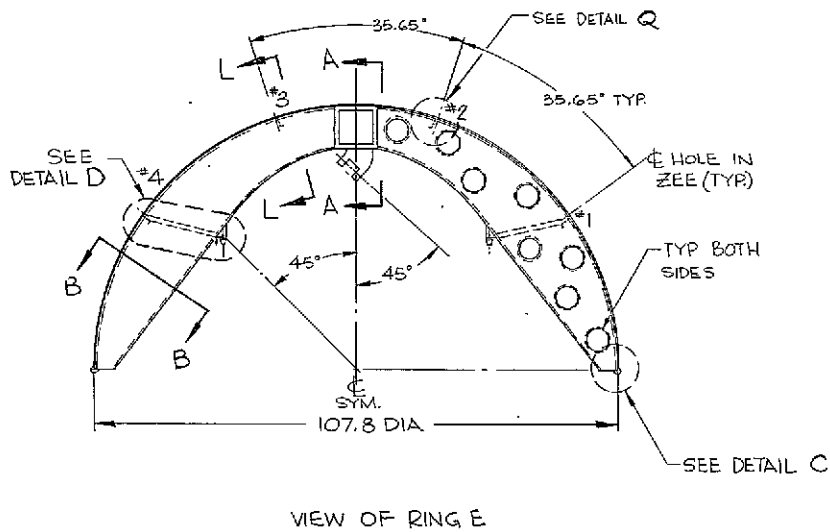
Hub Assembly (Sheet 2 of 2)
